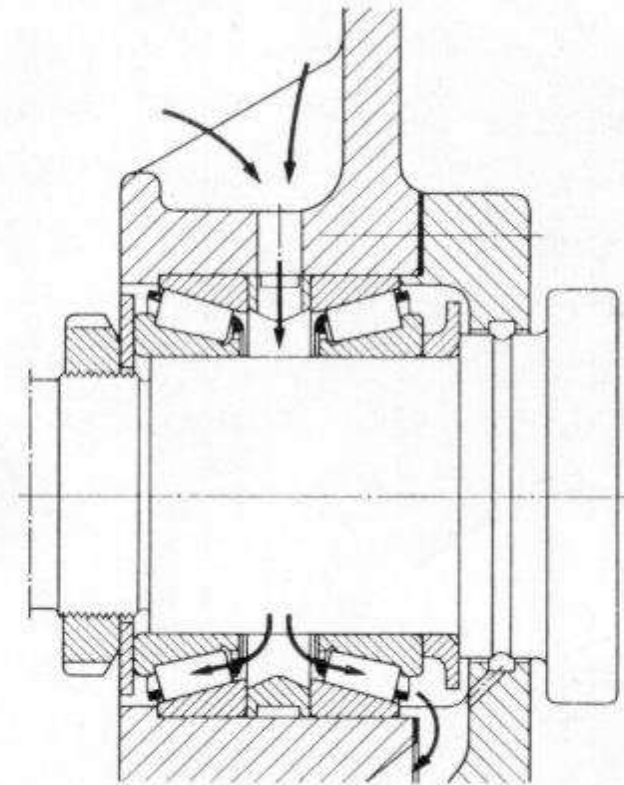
Circulating oil system for a spindle bearing arrangement incorporating two taper roller bearings
